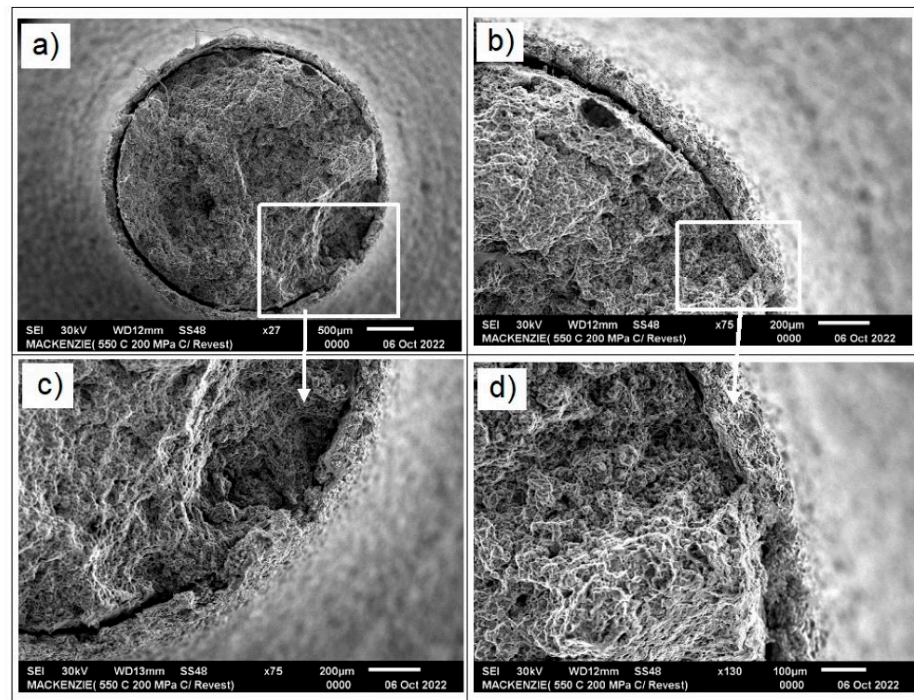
The fracture surface of the coated sample at 550 °C and 200 MPa: (a) full section, (b) enlargement of the upper right side, (c) detail of the partial coating detachment, (d) detail of the adhered coating.
